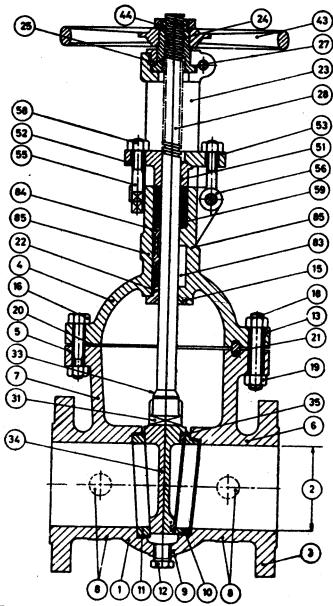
Outside Screw, Solid Wedge, Stem Rising Through Handwheel
